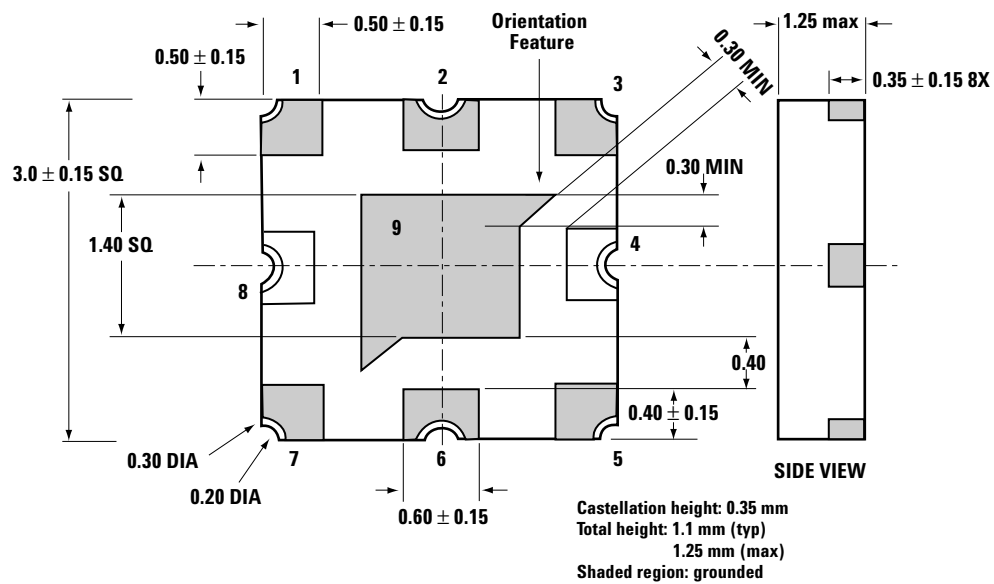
Detailed bottom and side view of package (dimensions in mm).
